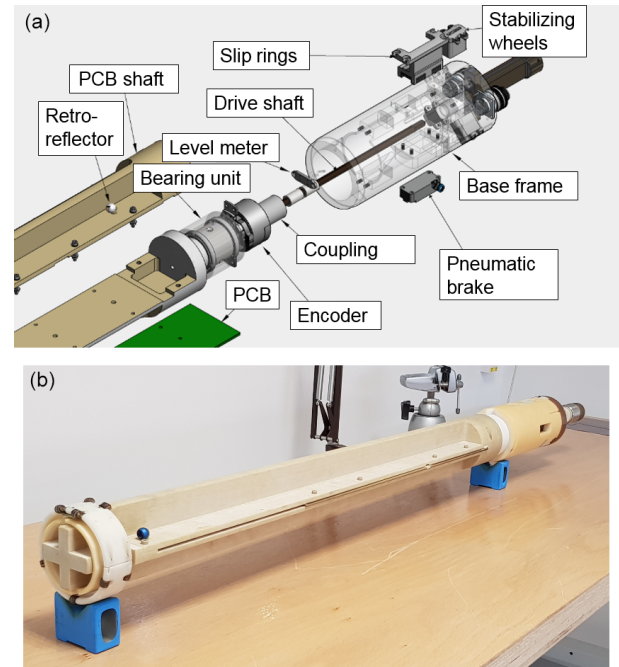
First prototype measurement system. (a) View of the probe base structure. (b) The assembled system.
